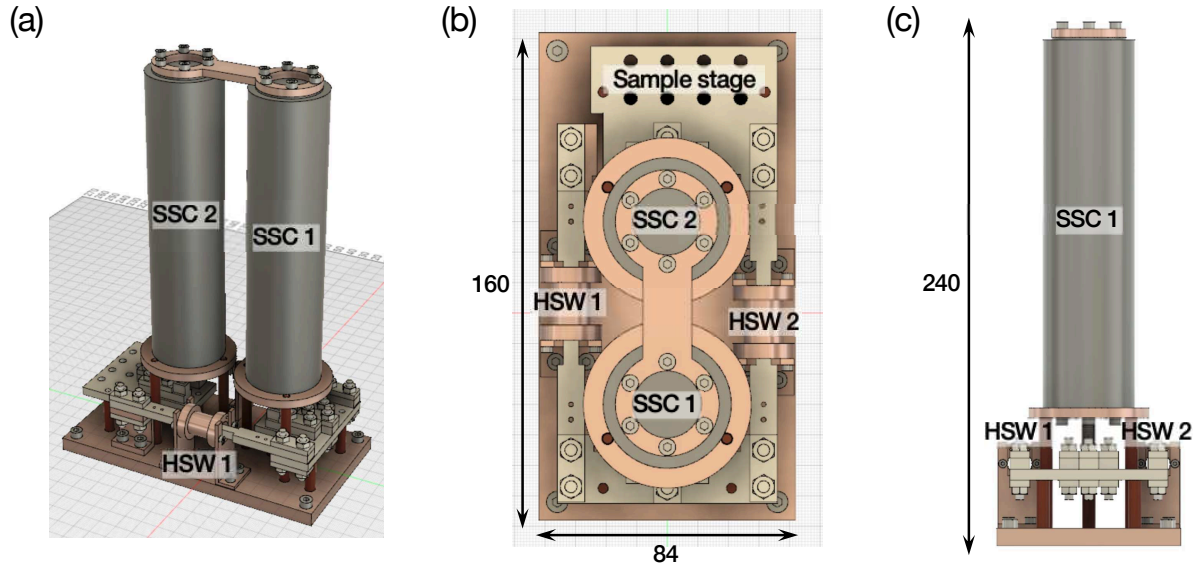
Three-dimensional CAD model of the CNDR. (a) whole view, (b) top view, and (c) side view of the CNDR. The unit of the dimensions denoted is millimeter.
